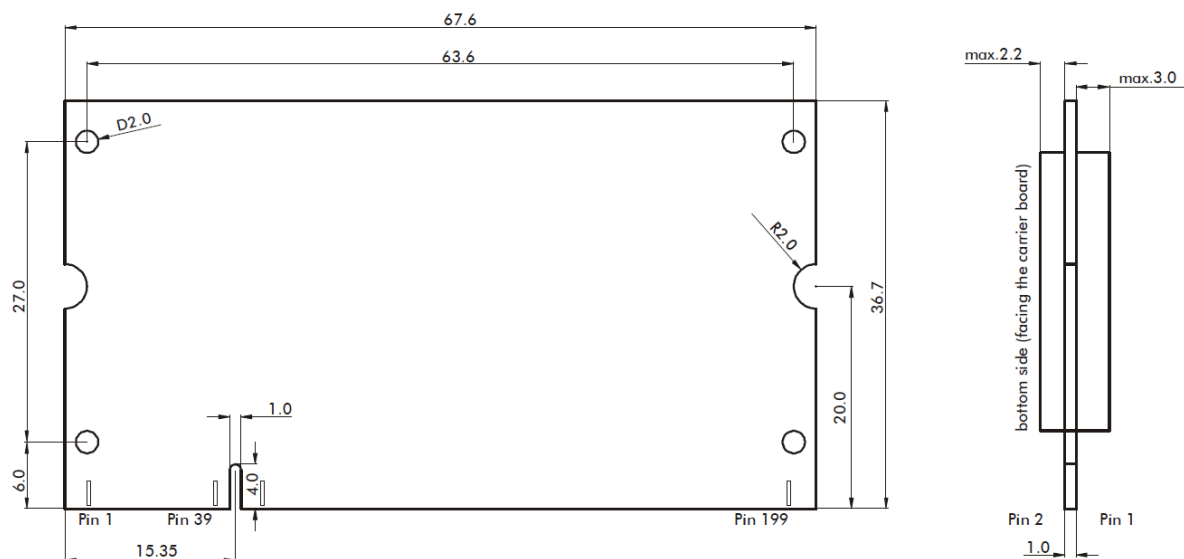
Mechanical dimensions of the Colibri module (top view)
